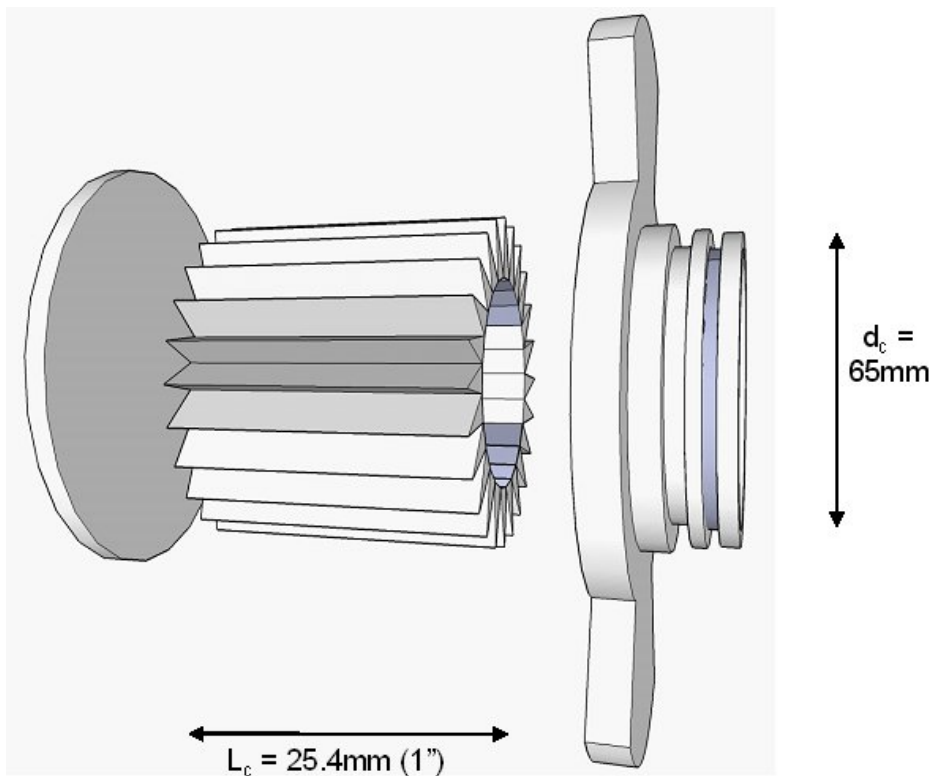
Exploded view of a 1" cartridge (without housing), illustrating the way in which the pleated membrane is installed inside the cartridge; in this case a 65% pleated configuration is shown. The illustration does not show the inner and outer perforated cores.
